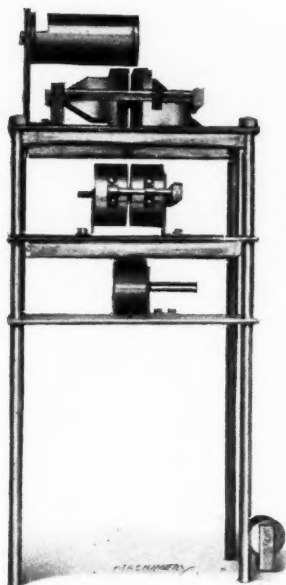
Arrangement of Gearing in Quick-change Gear-box
